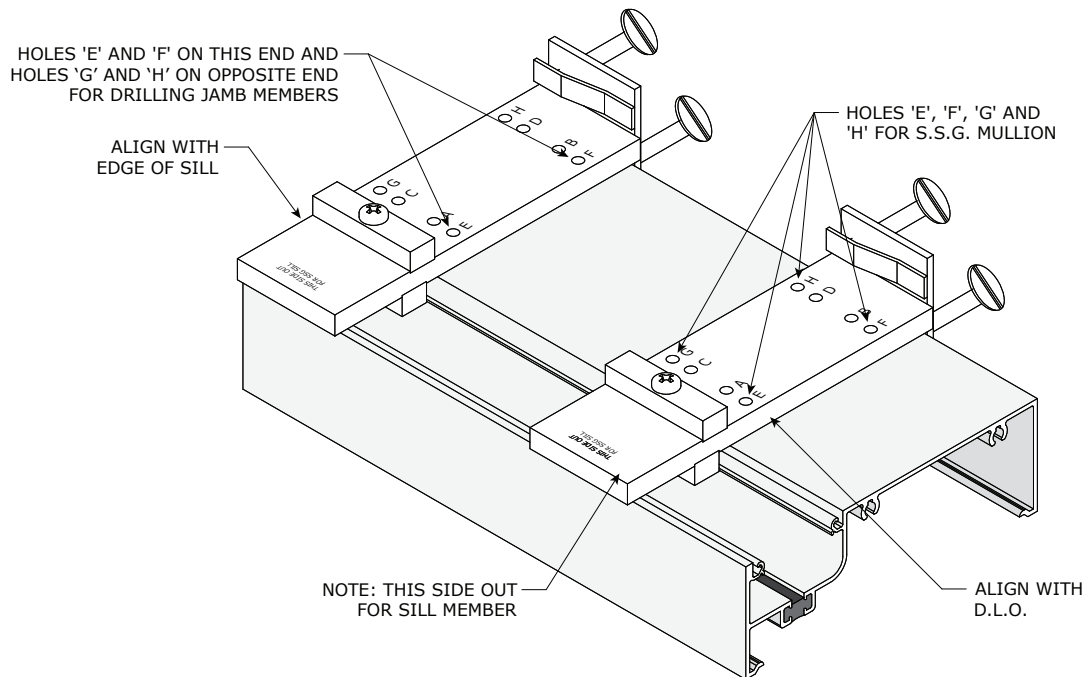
DJ-11 Drill Fixture for Front Set, Inside Glazed, Shear Block System
